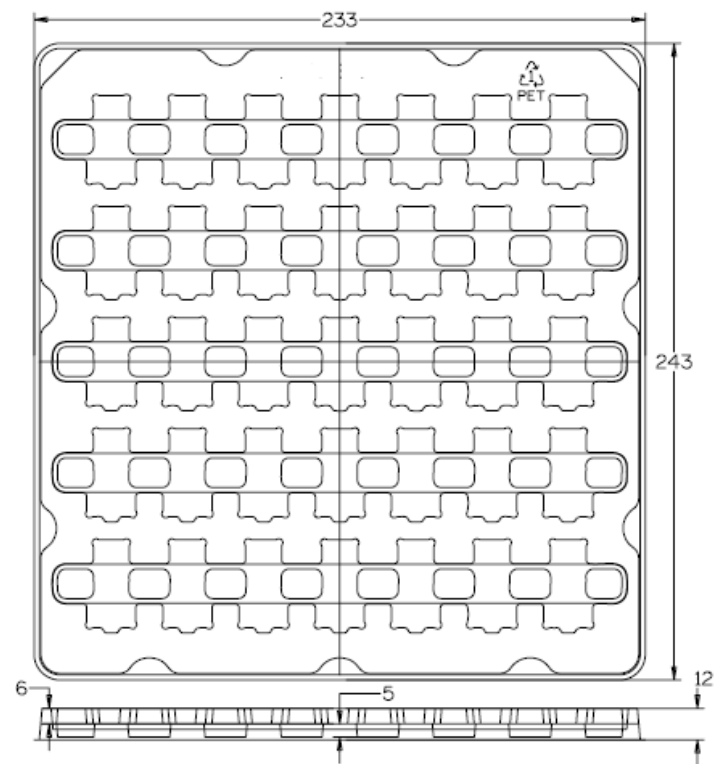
Package ray dimension for S3000 LXSx-PWxx-0024.
